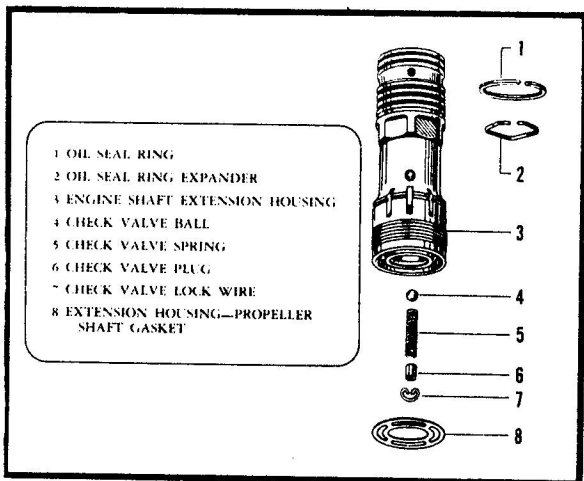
Engine Shaft Extension Assembly for Double-Acting Model 33E60
